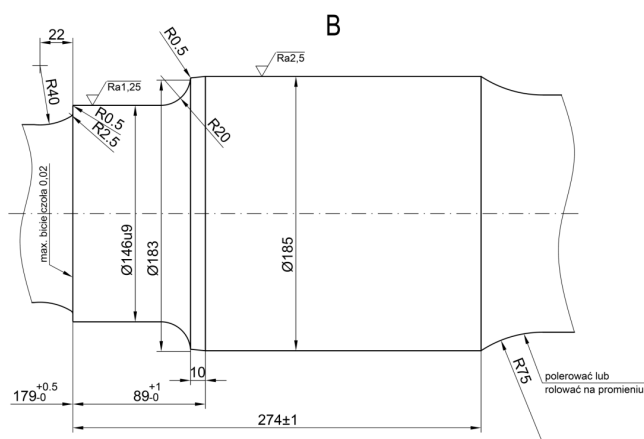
Assembly of the axle with a diameter of $\text{Ø}185$ mm and the front axle part with a diameter of $\text{Ø}146$ u9
